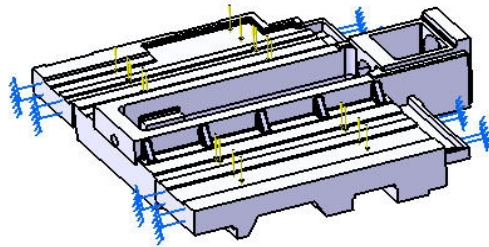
Configuration of the saddle under concentrated load caused by jig boring machine.
